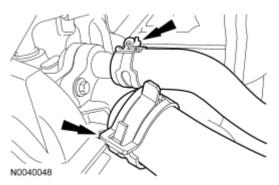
Locating Knock Sensor (KS) Electrical Connector And Harness Pin-Type Retainers Courtesy of FORD MOTOR CO.
